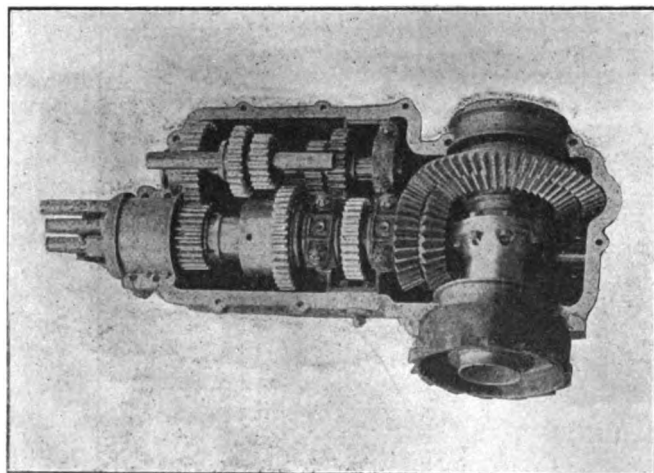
The Pilain Change Speed Gear with direct drive on third and fourth speeds by separate Bevel Gearing.
